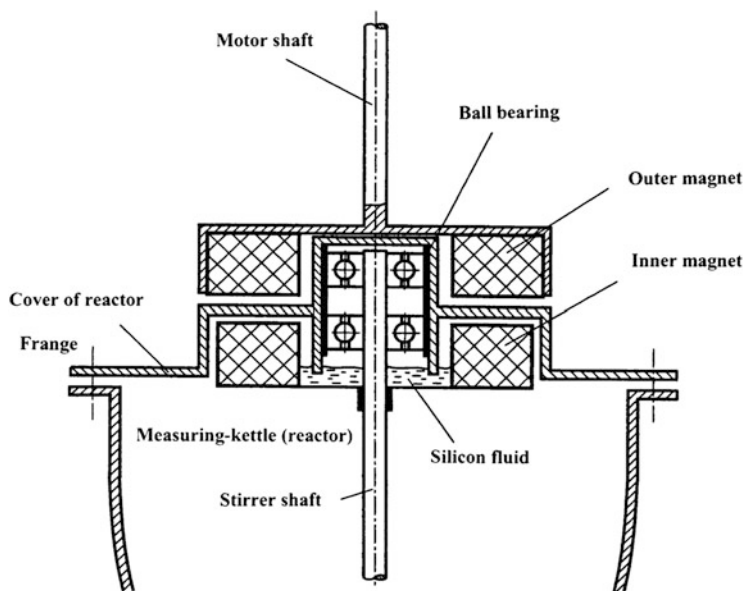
Magnet cluster with ball bearing of stirrer shaft
